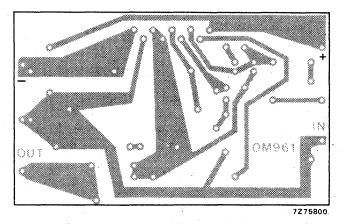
Component side of DIL-version; for component layout see Fig. 6.
